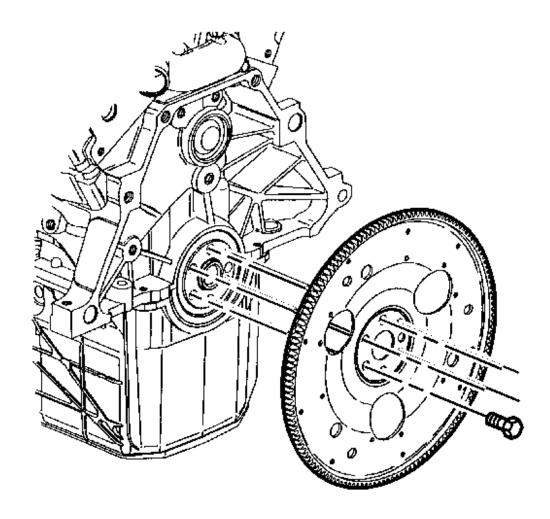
Installing Engine Flywheel Courtesy of GENERAL MOTORS CORP.
